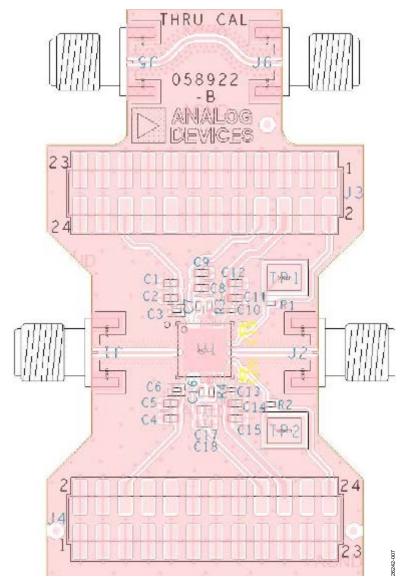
ADPA1107-EVALZ Assembly Drawing (J6 and J5 Not Installed)
